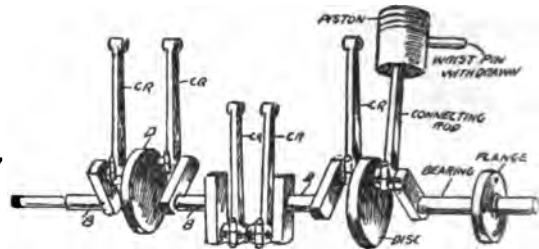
A built up type of crank shaft (seldom used). The above is a six cylinder crank, with four bearings.
